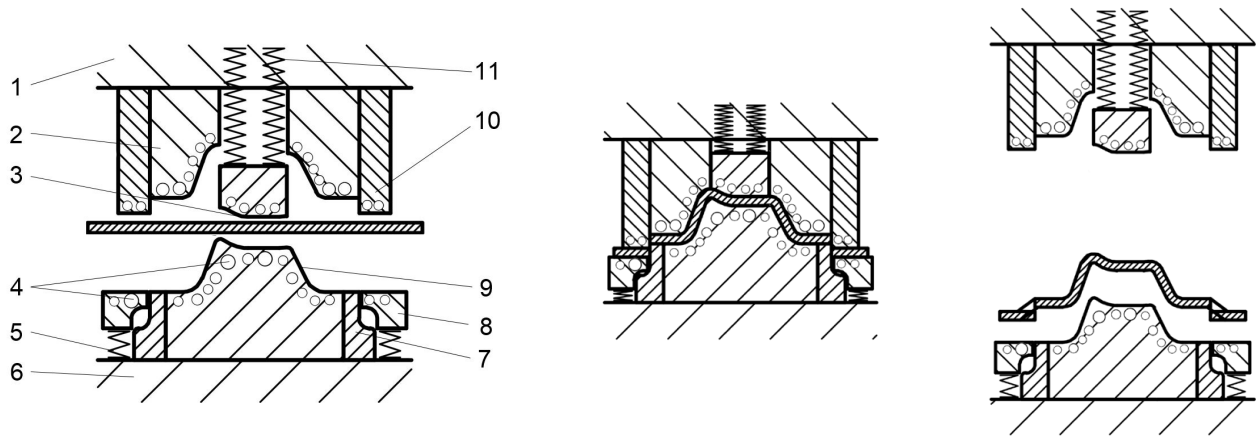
Tools arrangement and stages of B pillar forming process (1 – top plate, 2 – upper die, 3 – punch, 4 – cooling channels, 5 – blank holder spring, 6 – bottom plate, 7 – lower trimming cutter, 8 – blank holder, 9 – lower die, 10 – upper trimming cutter, 11 – punch spring)
